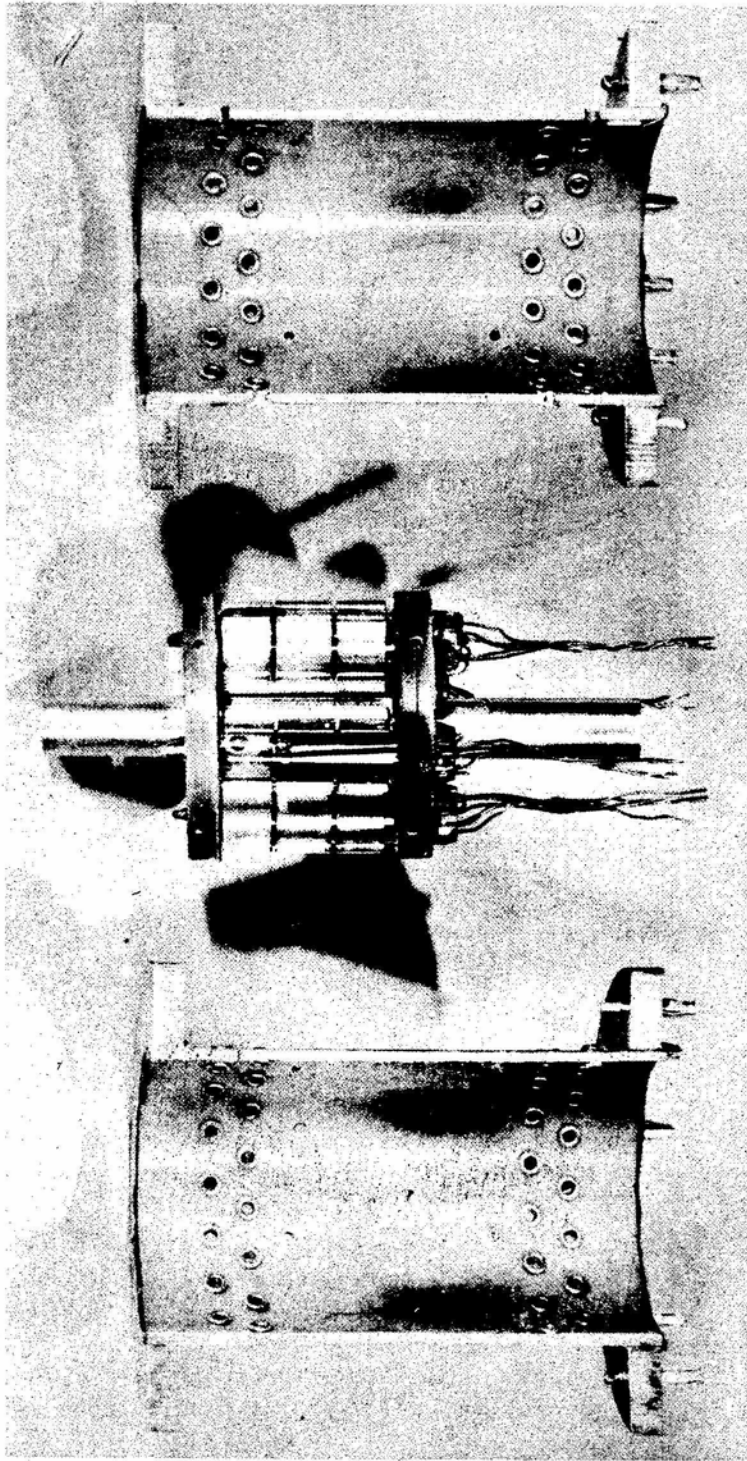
INTERNAL VIEW OF CYLINDRICAL ASSEMBLY
